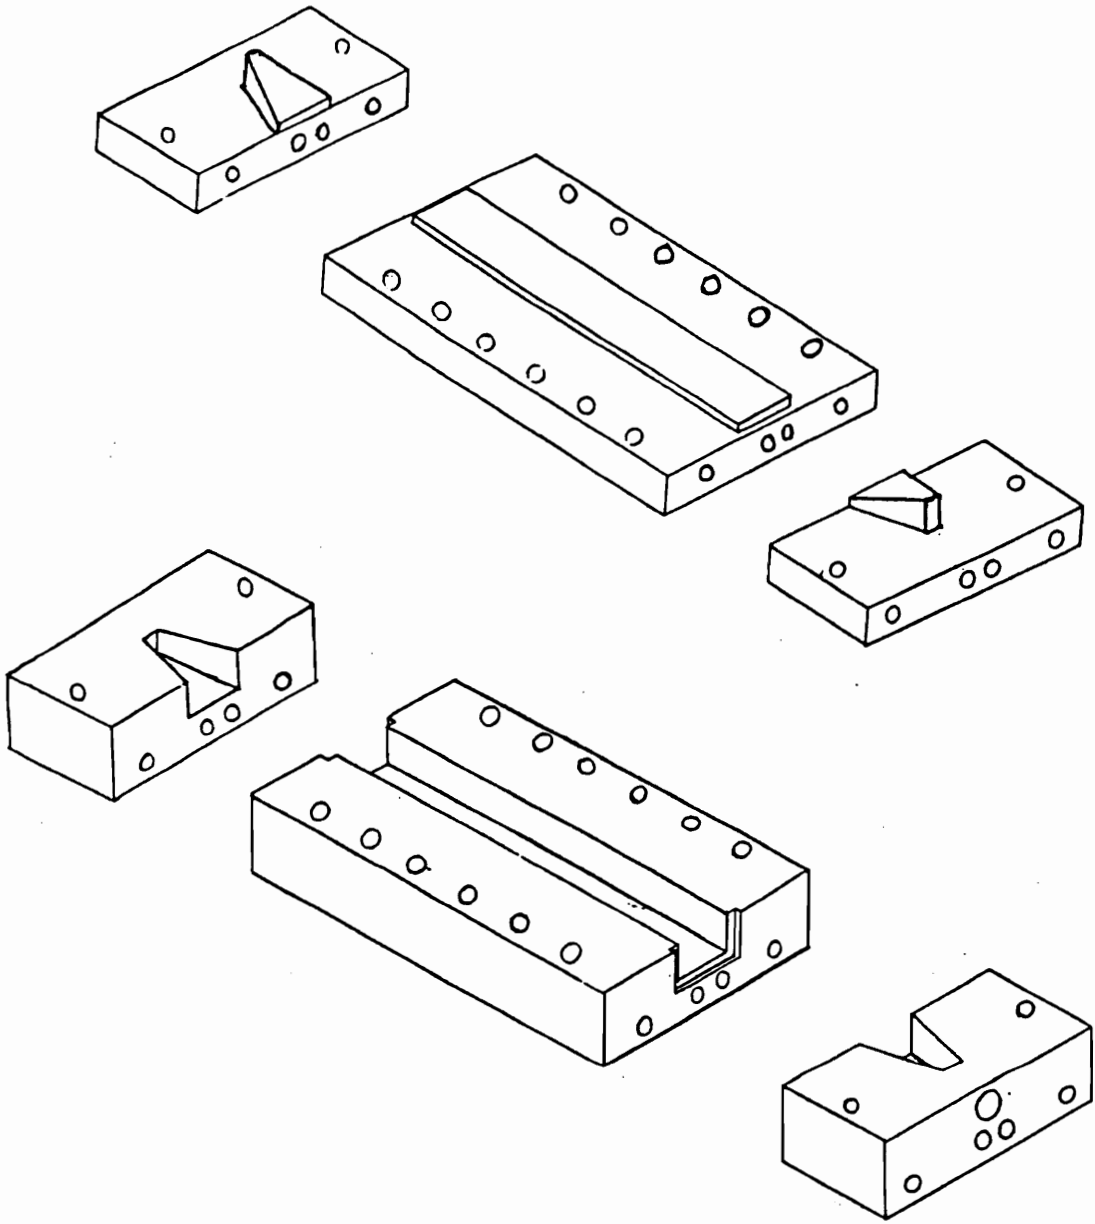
Individual pieces making up the microreactor. Center pieces are for horizontal duct at a length of 15.24 cm. Inlet section and outlet sections are similar.
